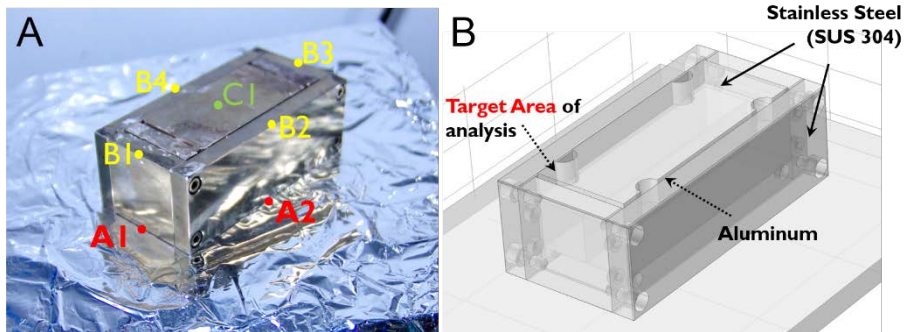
Photograph of assembled mold and 3D modelling image
